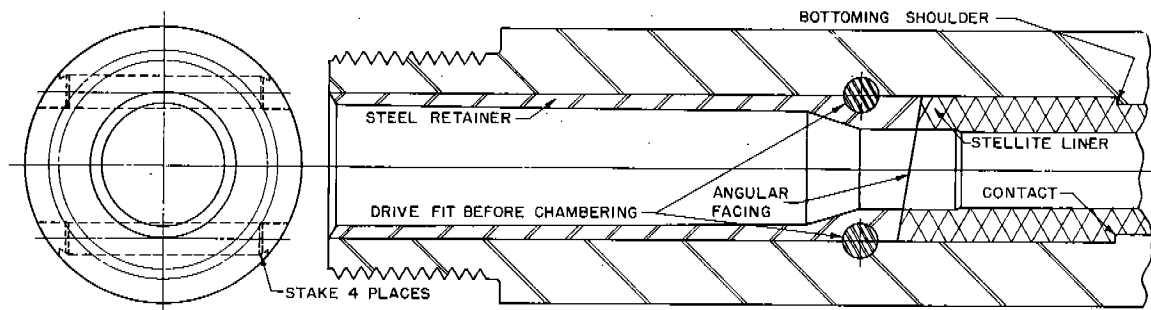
Caliber .30 Browning machine gun barrel assembly, M2, with stellite liner staked with pins; Johnson design. (This figure has appeared as Figure 4 in NDRC Report No. A-455.)
